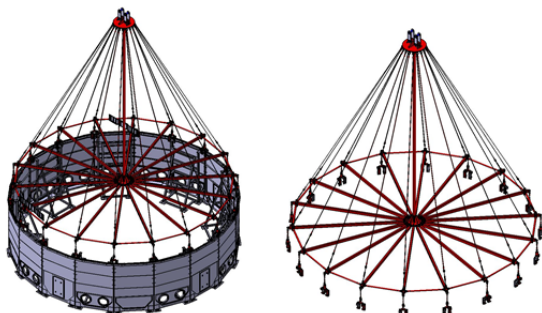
Configuration of CC Feeder ring lift tool installed with LCTS Cylinders assembled and CC Feeder ring lift tool disassembled
